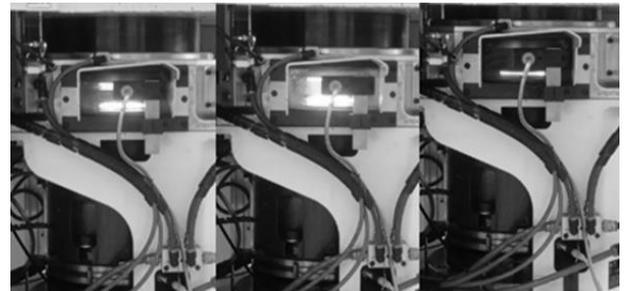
View of the subsequent stages of friction welding of the piston with low pressure. [30]
